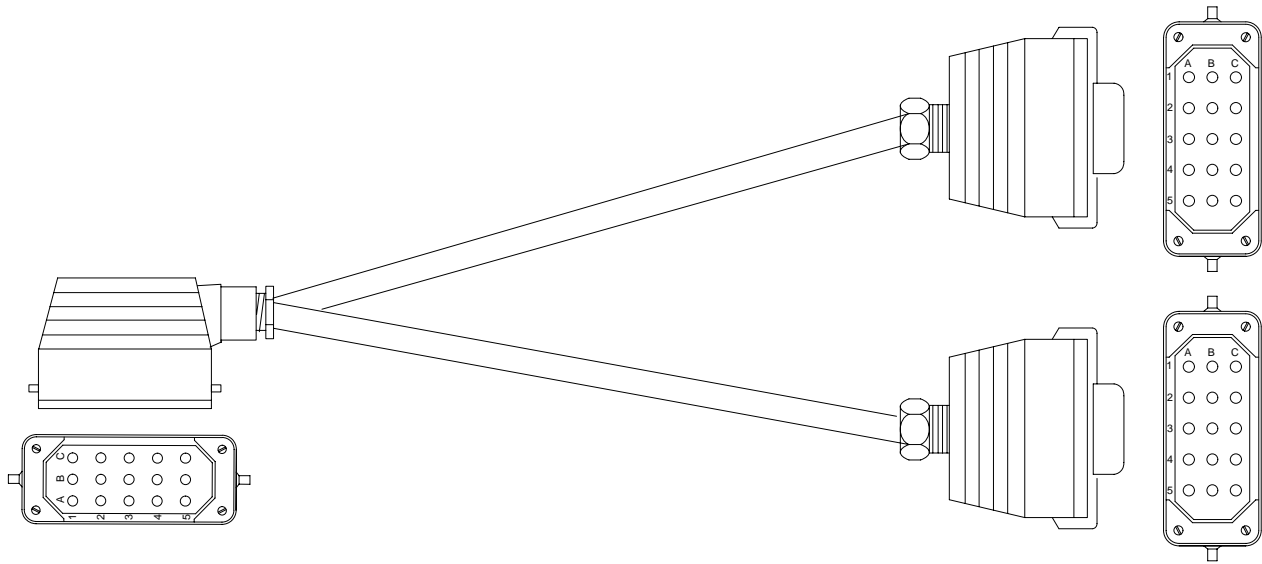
M-style adapter cable (one heated air manifold cordset) wiring diagram
